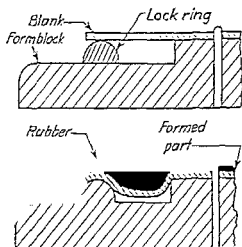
Shearing (trimming) a rubber-formed part.
